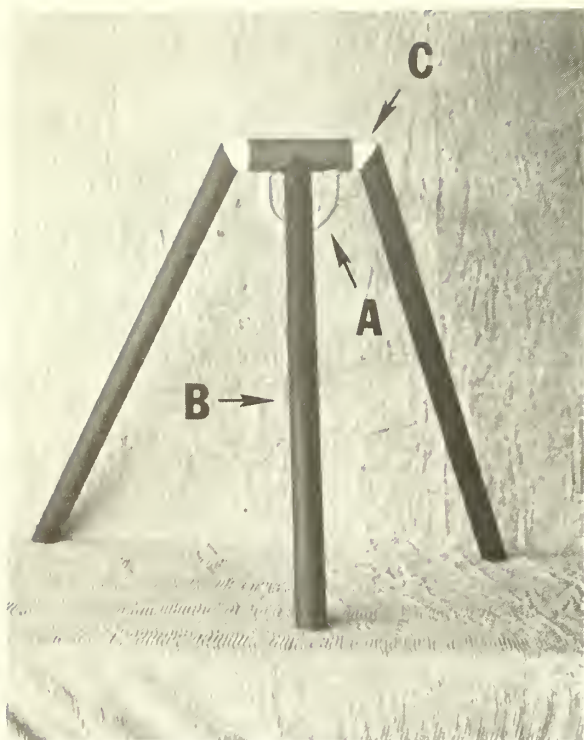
Component parts of the tripod mount: A, bail; B, leg welded to pivotal sleeve, and C, spacer welded between two legs.
